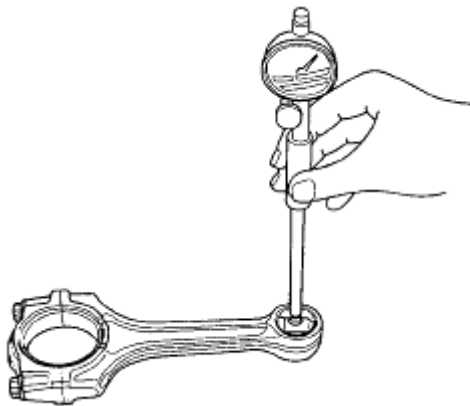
Measuring Piston Pin-To-Connecting Rod Clearance
